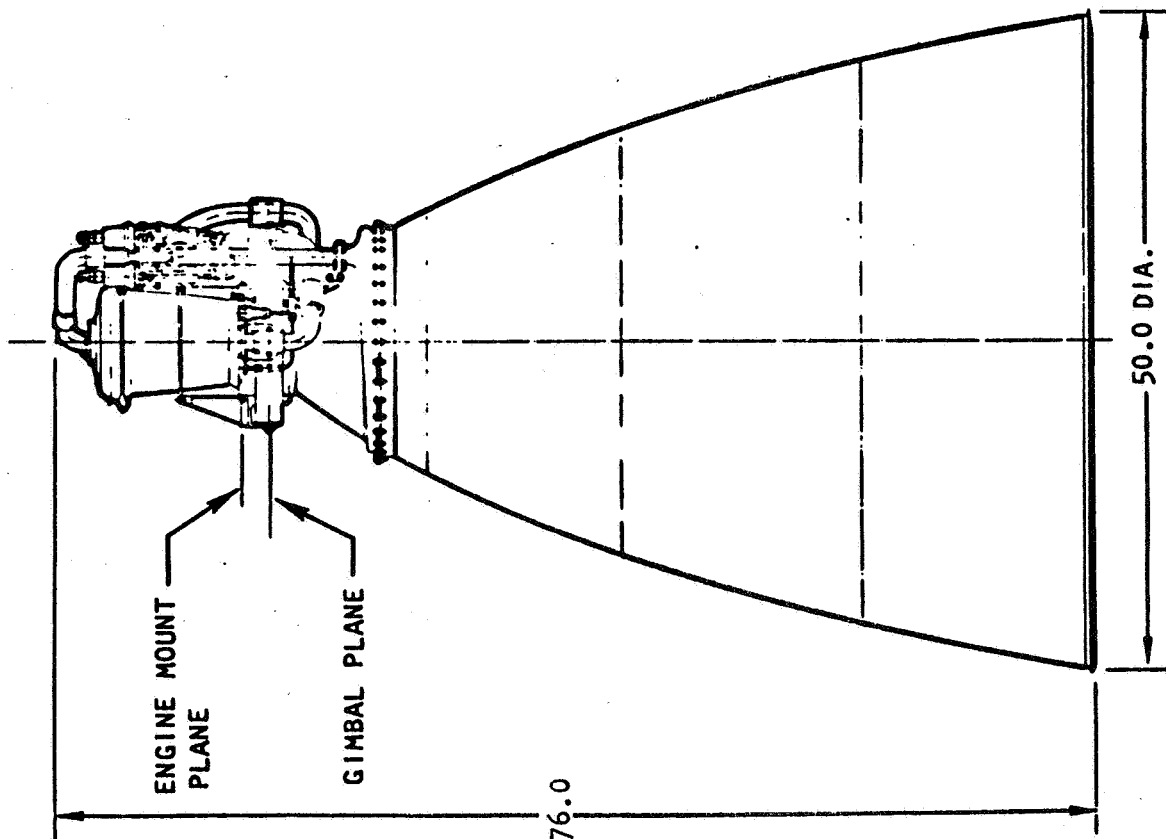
OME Thrust Chamber Assembly Demonstrator Configuration
